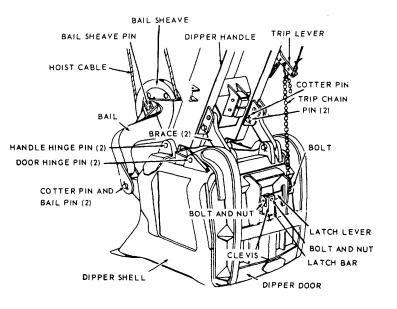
Shovel dipper, removal, disassembly, reassembly, and -installation.
